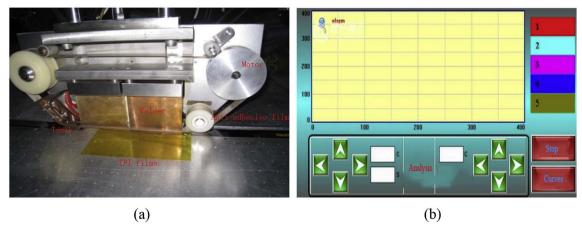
Resistance welding machine: (a) Photo, (b) Control interface
